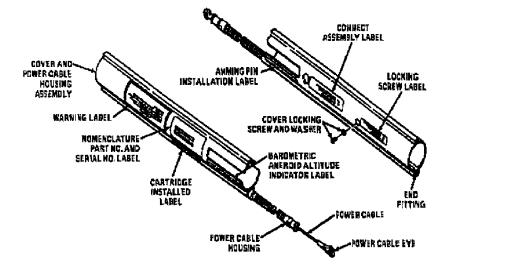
Attachment of Swaged Ball and Power Cable Eye
